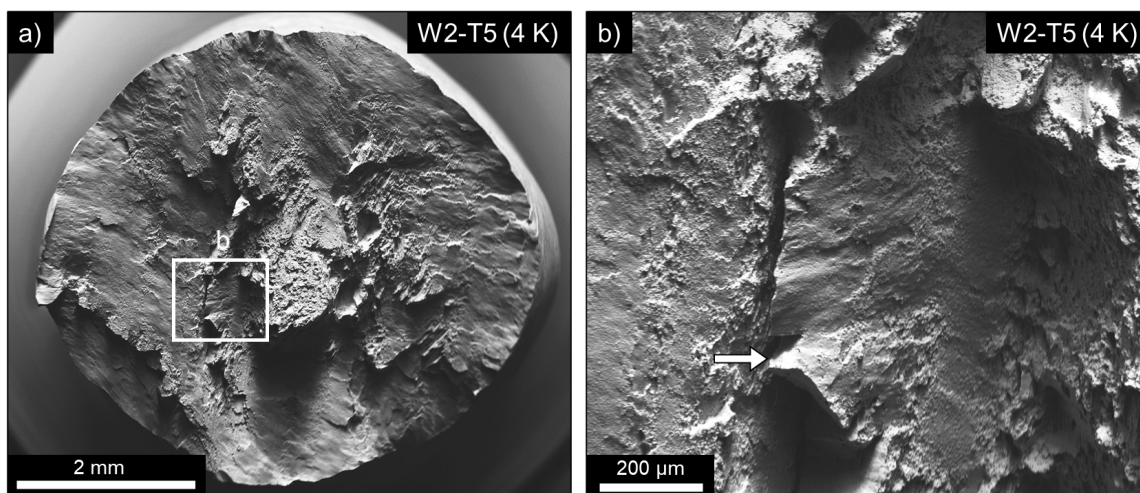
a) SE image of the entire fracture surface of a tensile specimen brought to fracture in 4K, b) cracks at the surface with adjacent cleavage fractures.
